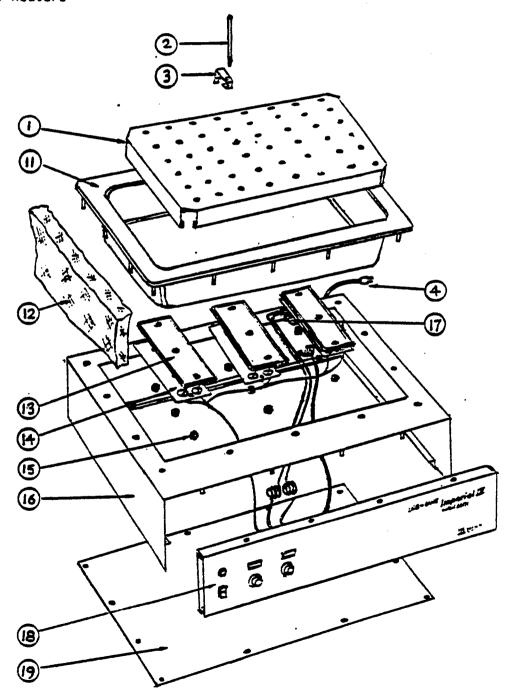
EXPLODED VIEW OF THE MODEL 18010/18010-1 WATER BATH
